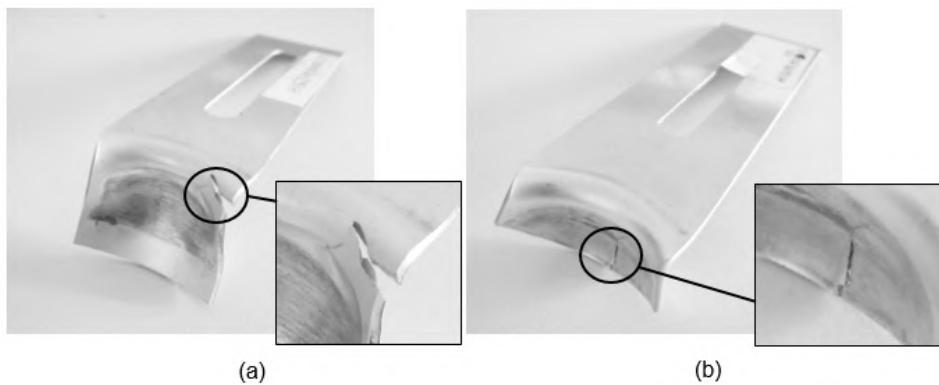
Failed stretch flanges included in table 6.2c corresponding to (a) fracture at the corner ($w_0 = 32$ mm and $l_0 = 25$ mm) and (b) fracture at the edge ($w_0 = 36$ mm and $l_0 = 15$ mm).
